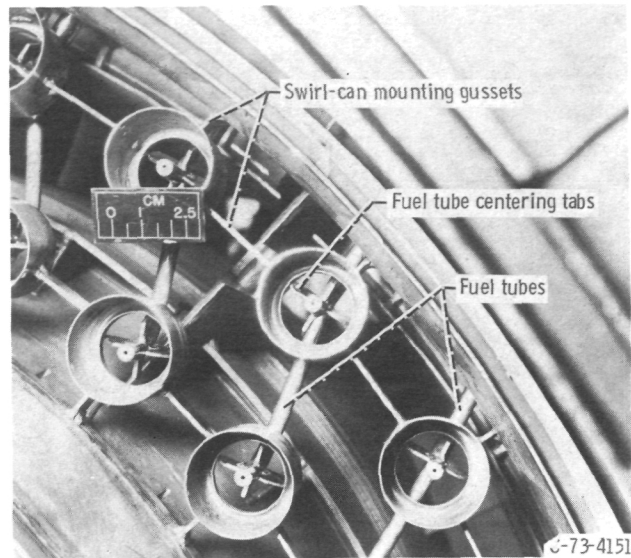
36-36 Module swirl-can mounting technique and fuel tube centering tabs.
